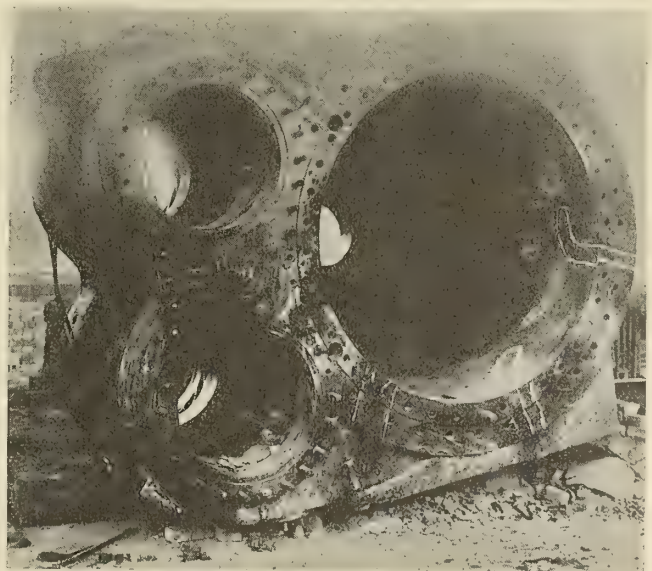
Welding of Low-Pressure Cylinder Completed, Casting Fully Restored
